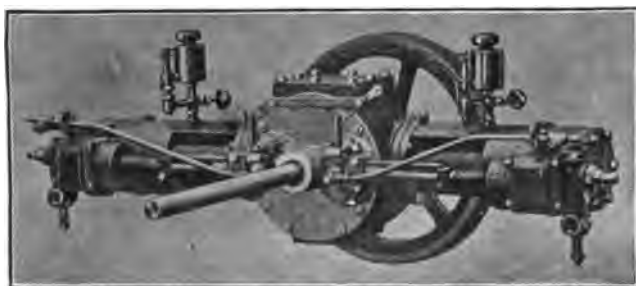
Double Opposed Horizontal Cylinder Motor of the Haynes-Apperson Carriages. The two cylinders of this motor are somewhat offset, as shown in the cut, the crank rods working on two cranks. The long crank shaft shown at the front of the engine is for carrying the change speed gear already described. The reciprocating parts are lubricated by adjustable oil feed cups shown at the top of each cylinder. Ignition is by break contact spark, the exhaust connections being on the same plan as those described for other motors. The inlet valves are operated by suction, and are at right angles to the positively operated exhausts.
